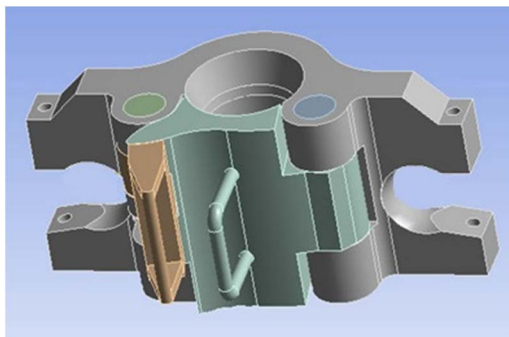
CDZ side-door-type 18° taper shoulder drill pipe elevator
